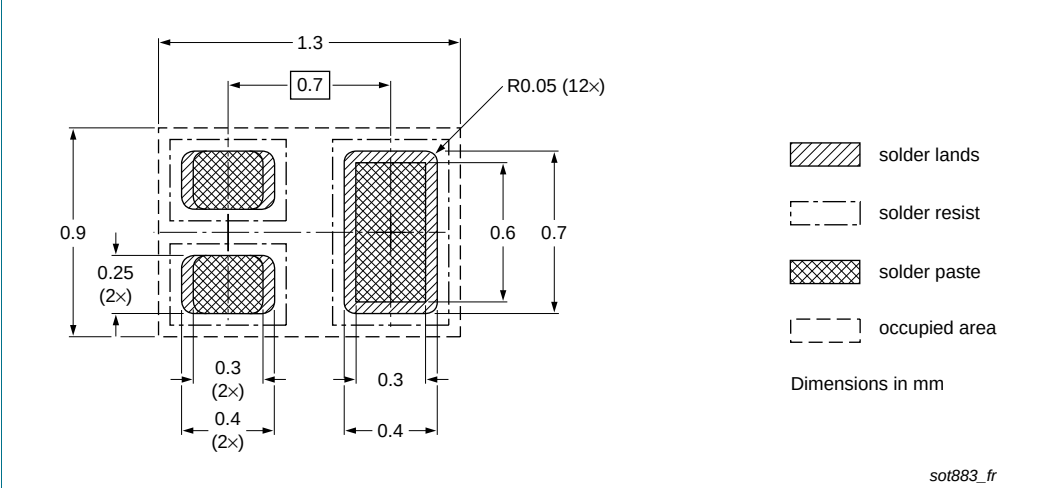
Reflow soldering footprint SOT883 (SC-101)
